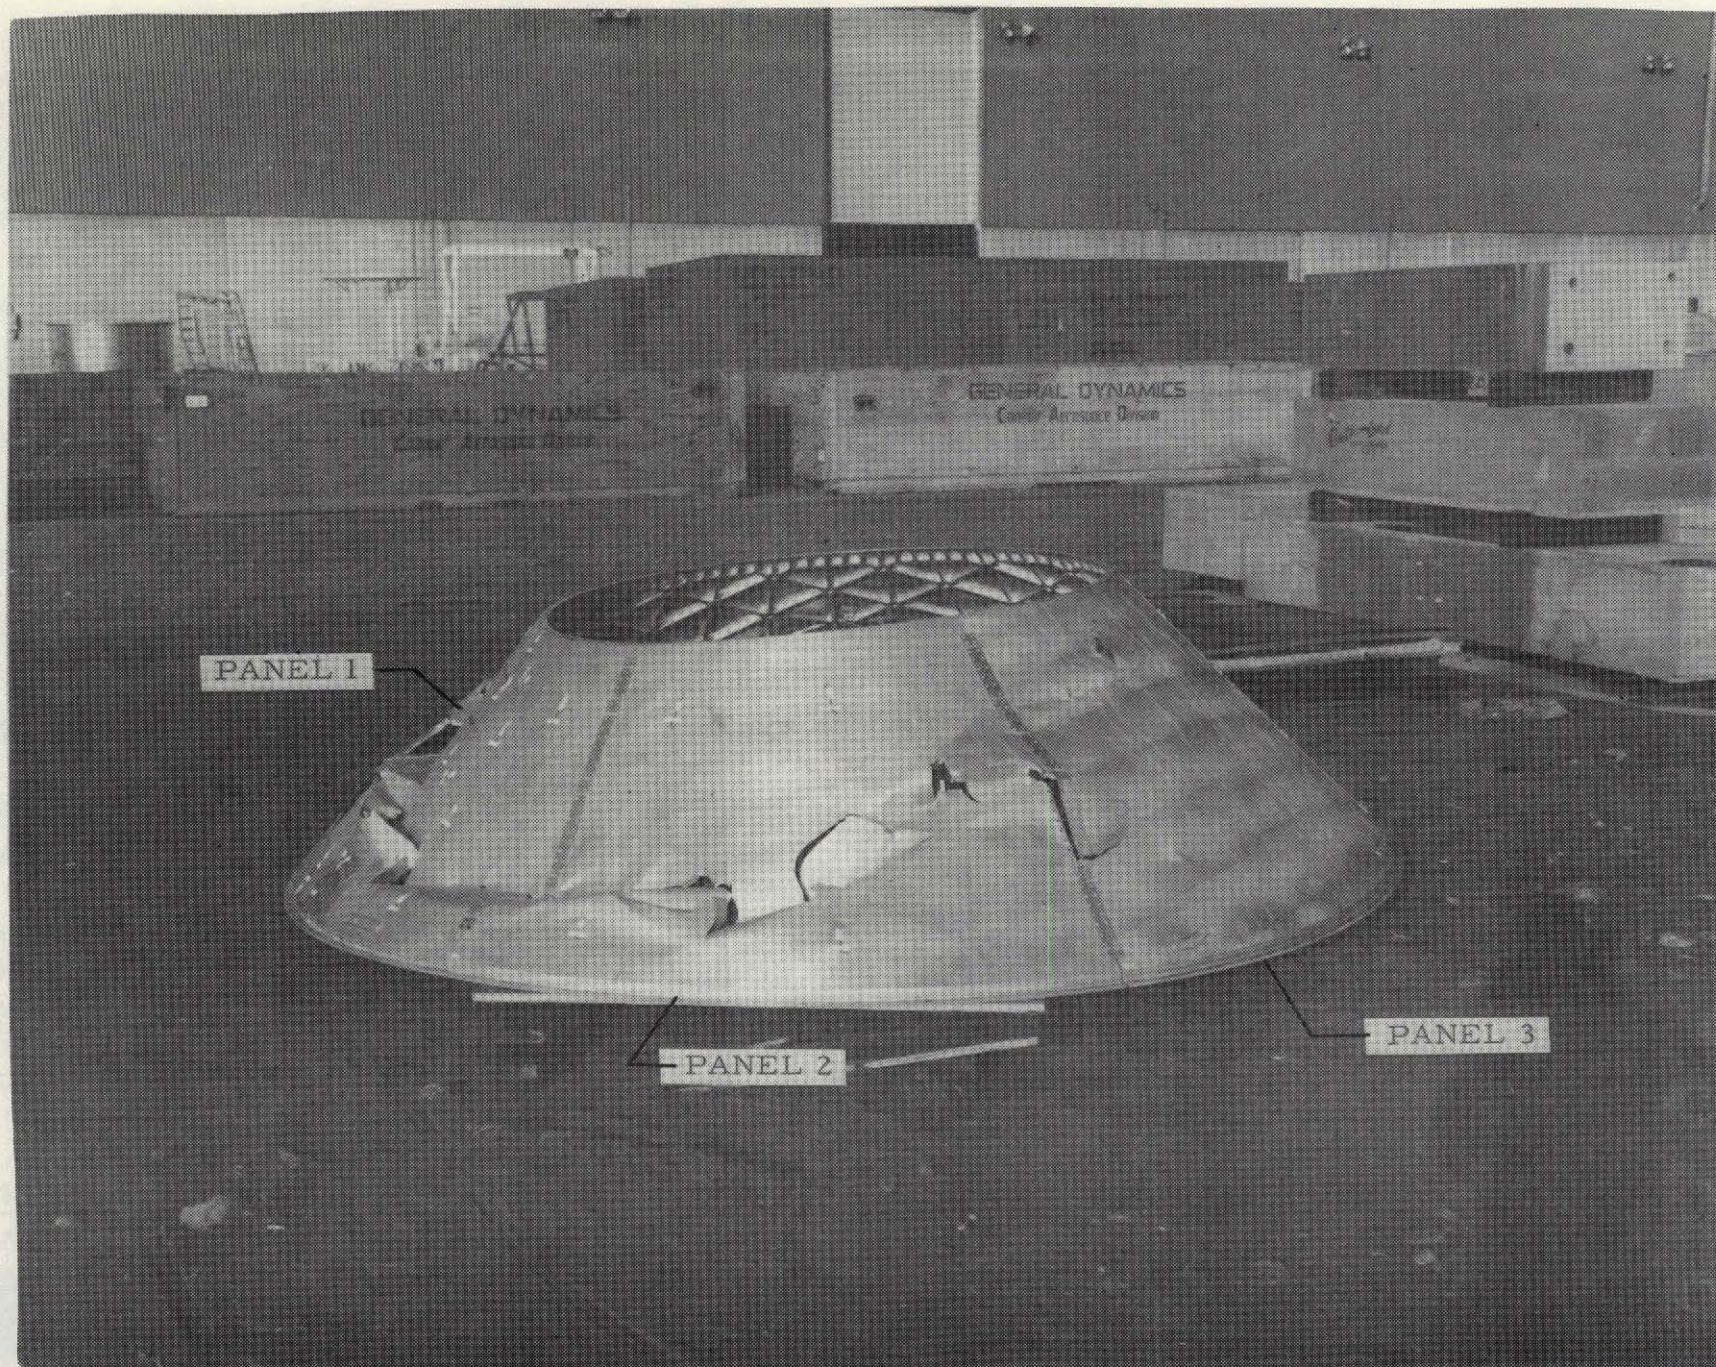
FAILED TEST SPECIMEN- PANEL 2
